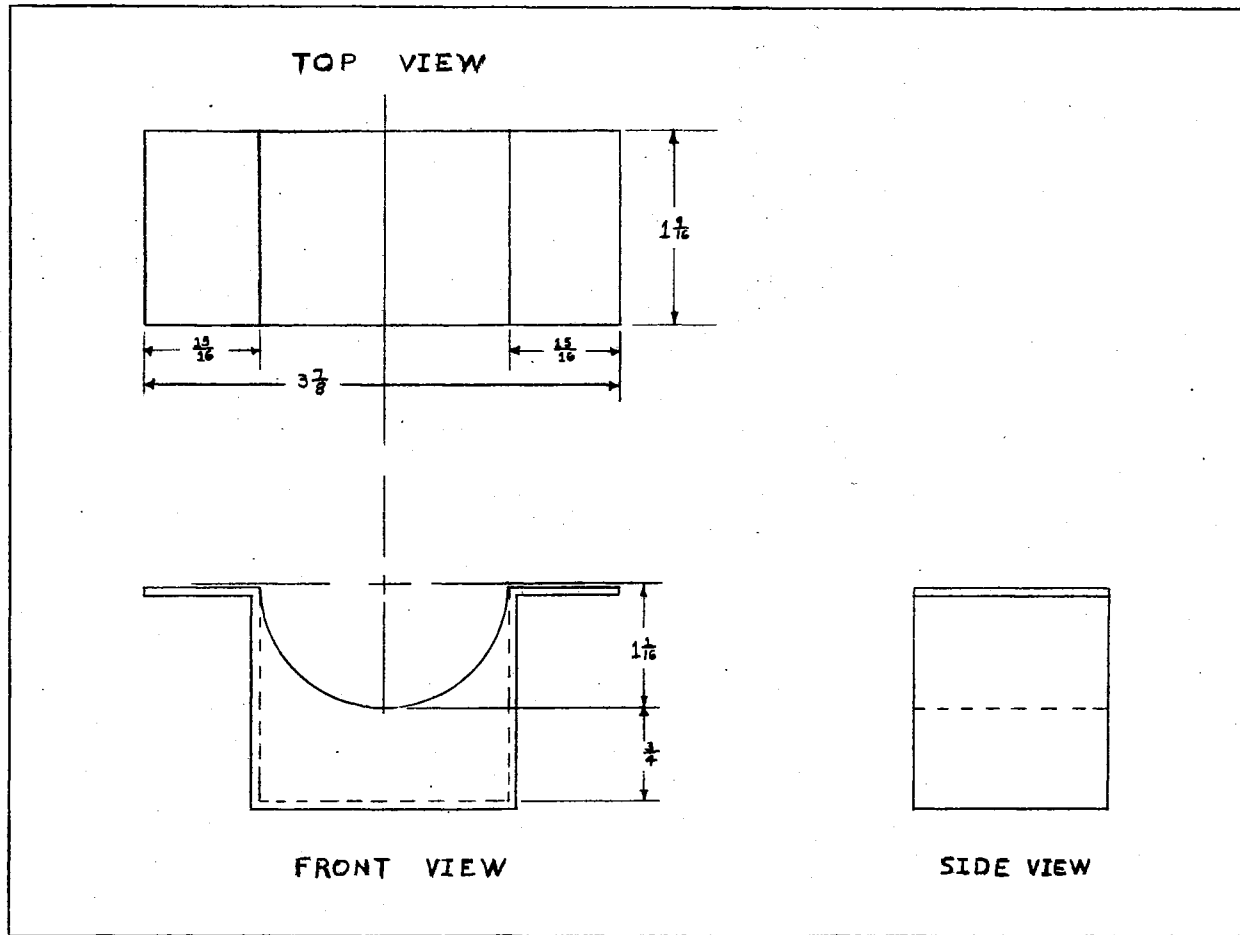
Detailed Dimensioned Drawing of the Material Catch Tank
